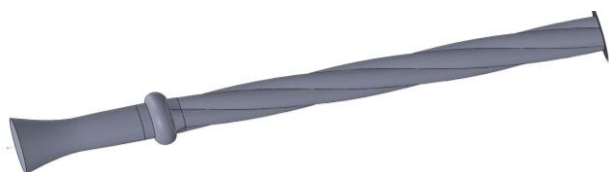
Model of workpiece No. 5 using SolidWorks software
